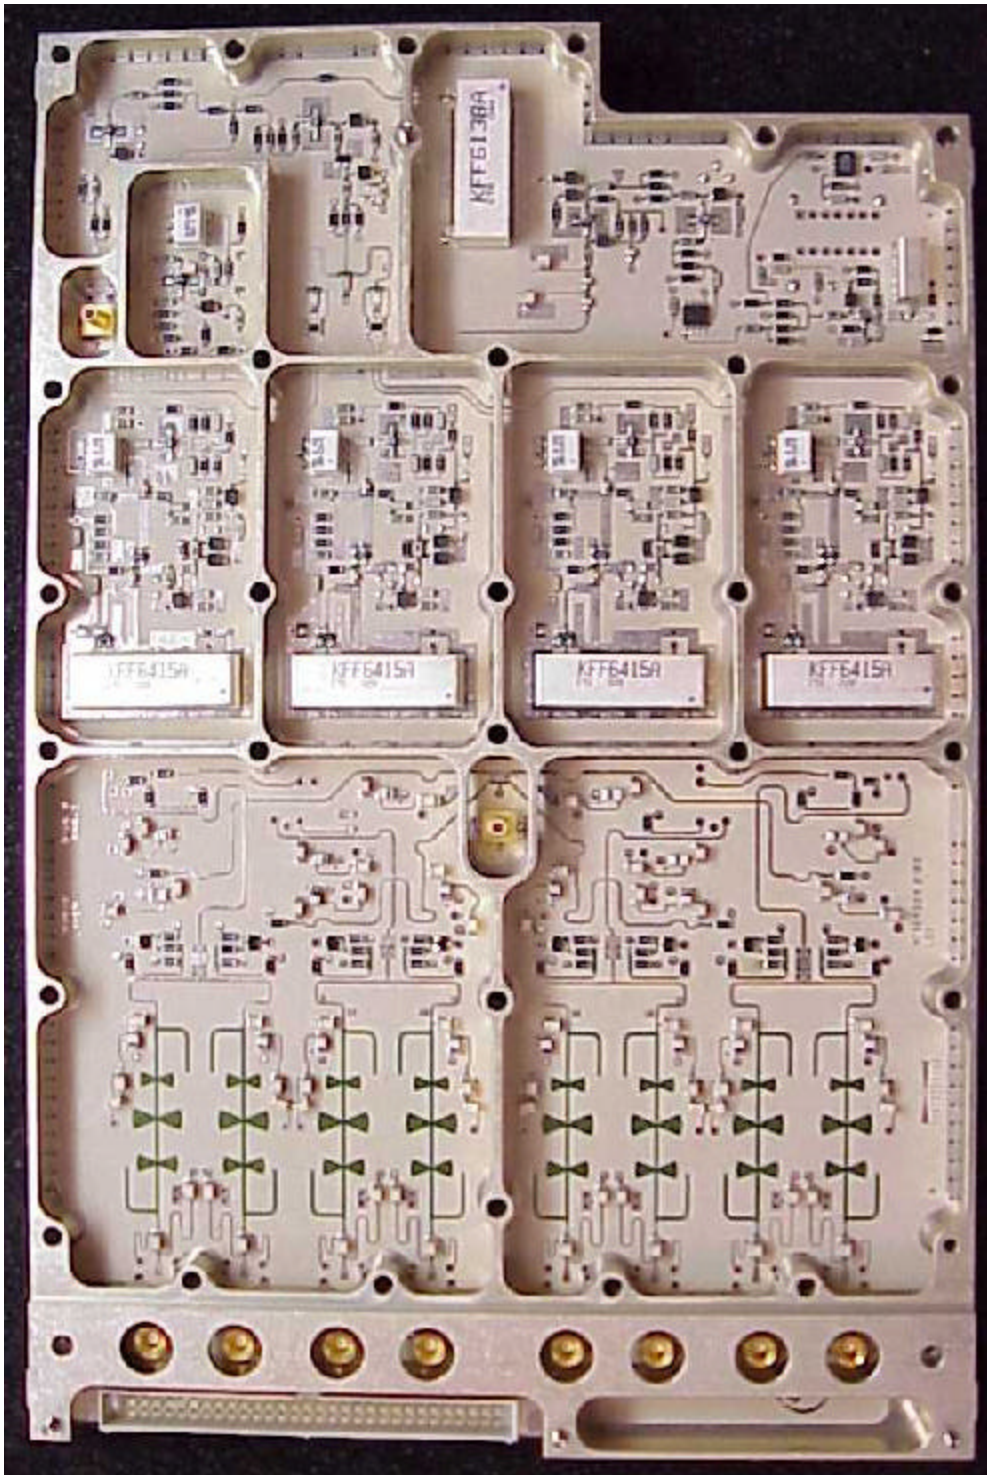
View of A5 Receiver – I/O Assembly with Cover Removed. Side B
